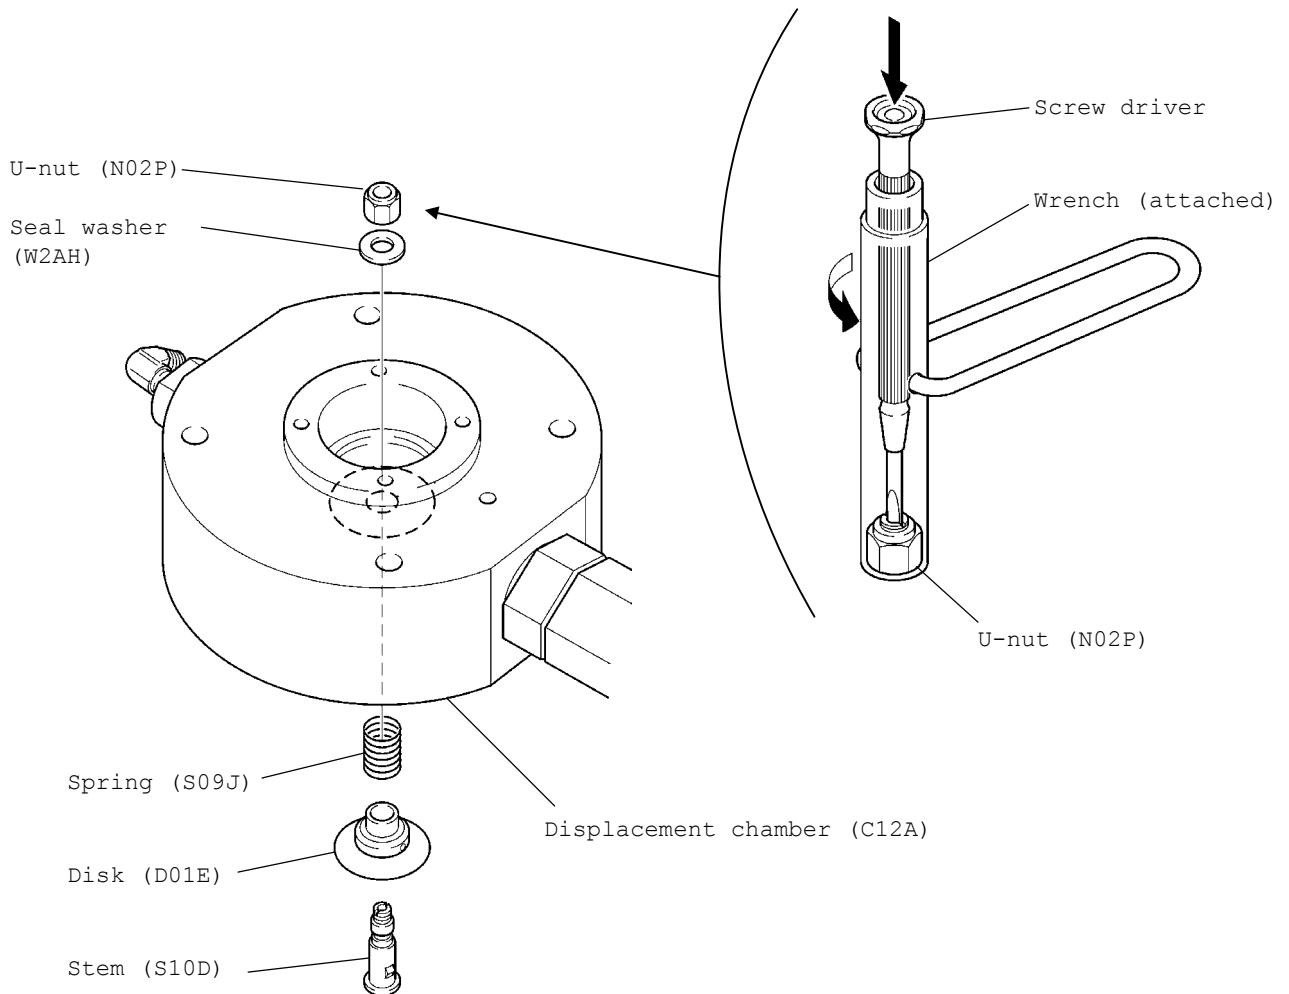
Position valve disassembly (DV-1.8-100)
